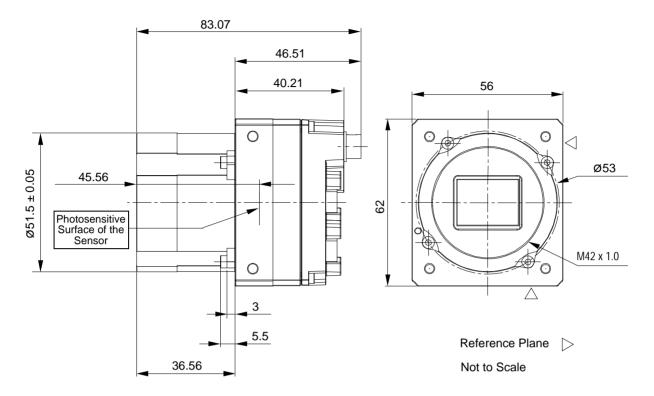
M42 x 1.0 FBD 45.5 Mount Adapter on a Basler beat Camera Link Camera; Dimensions in mm
